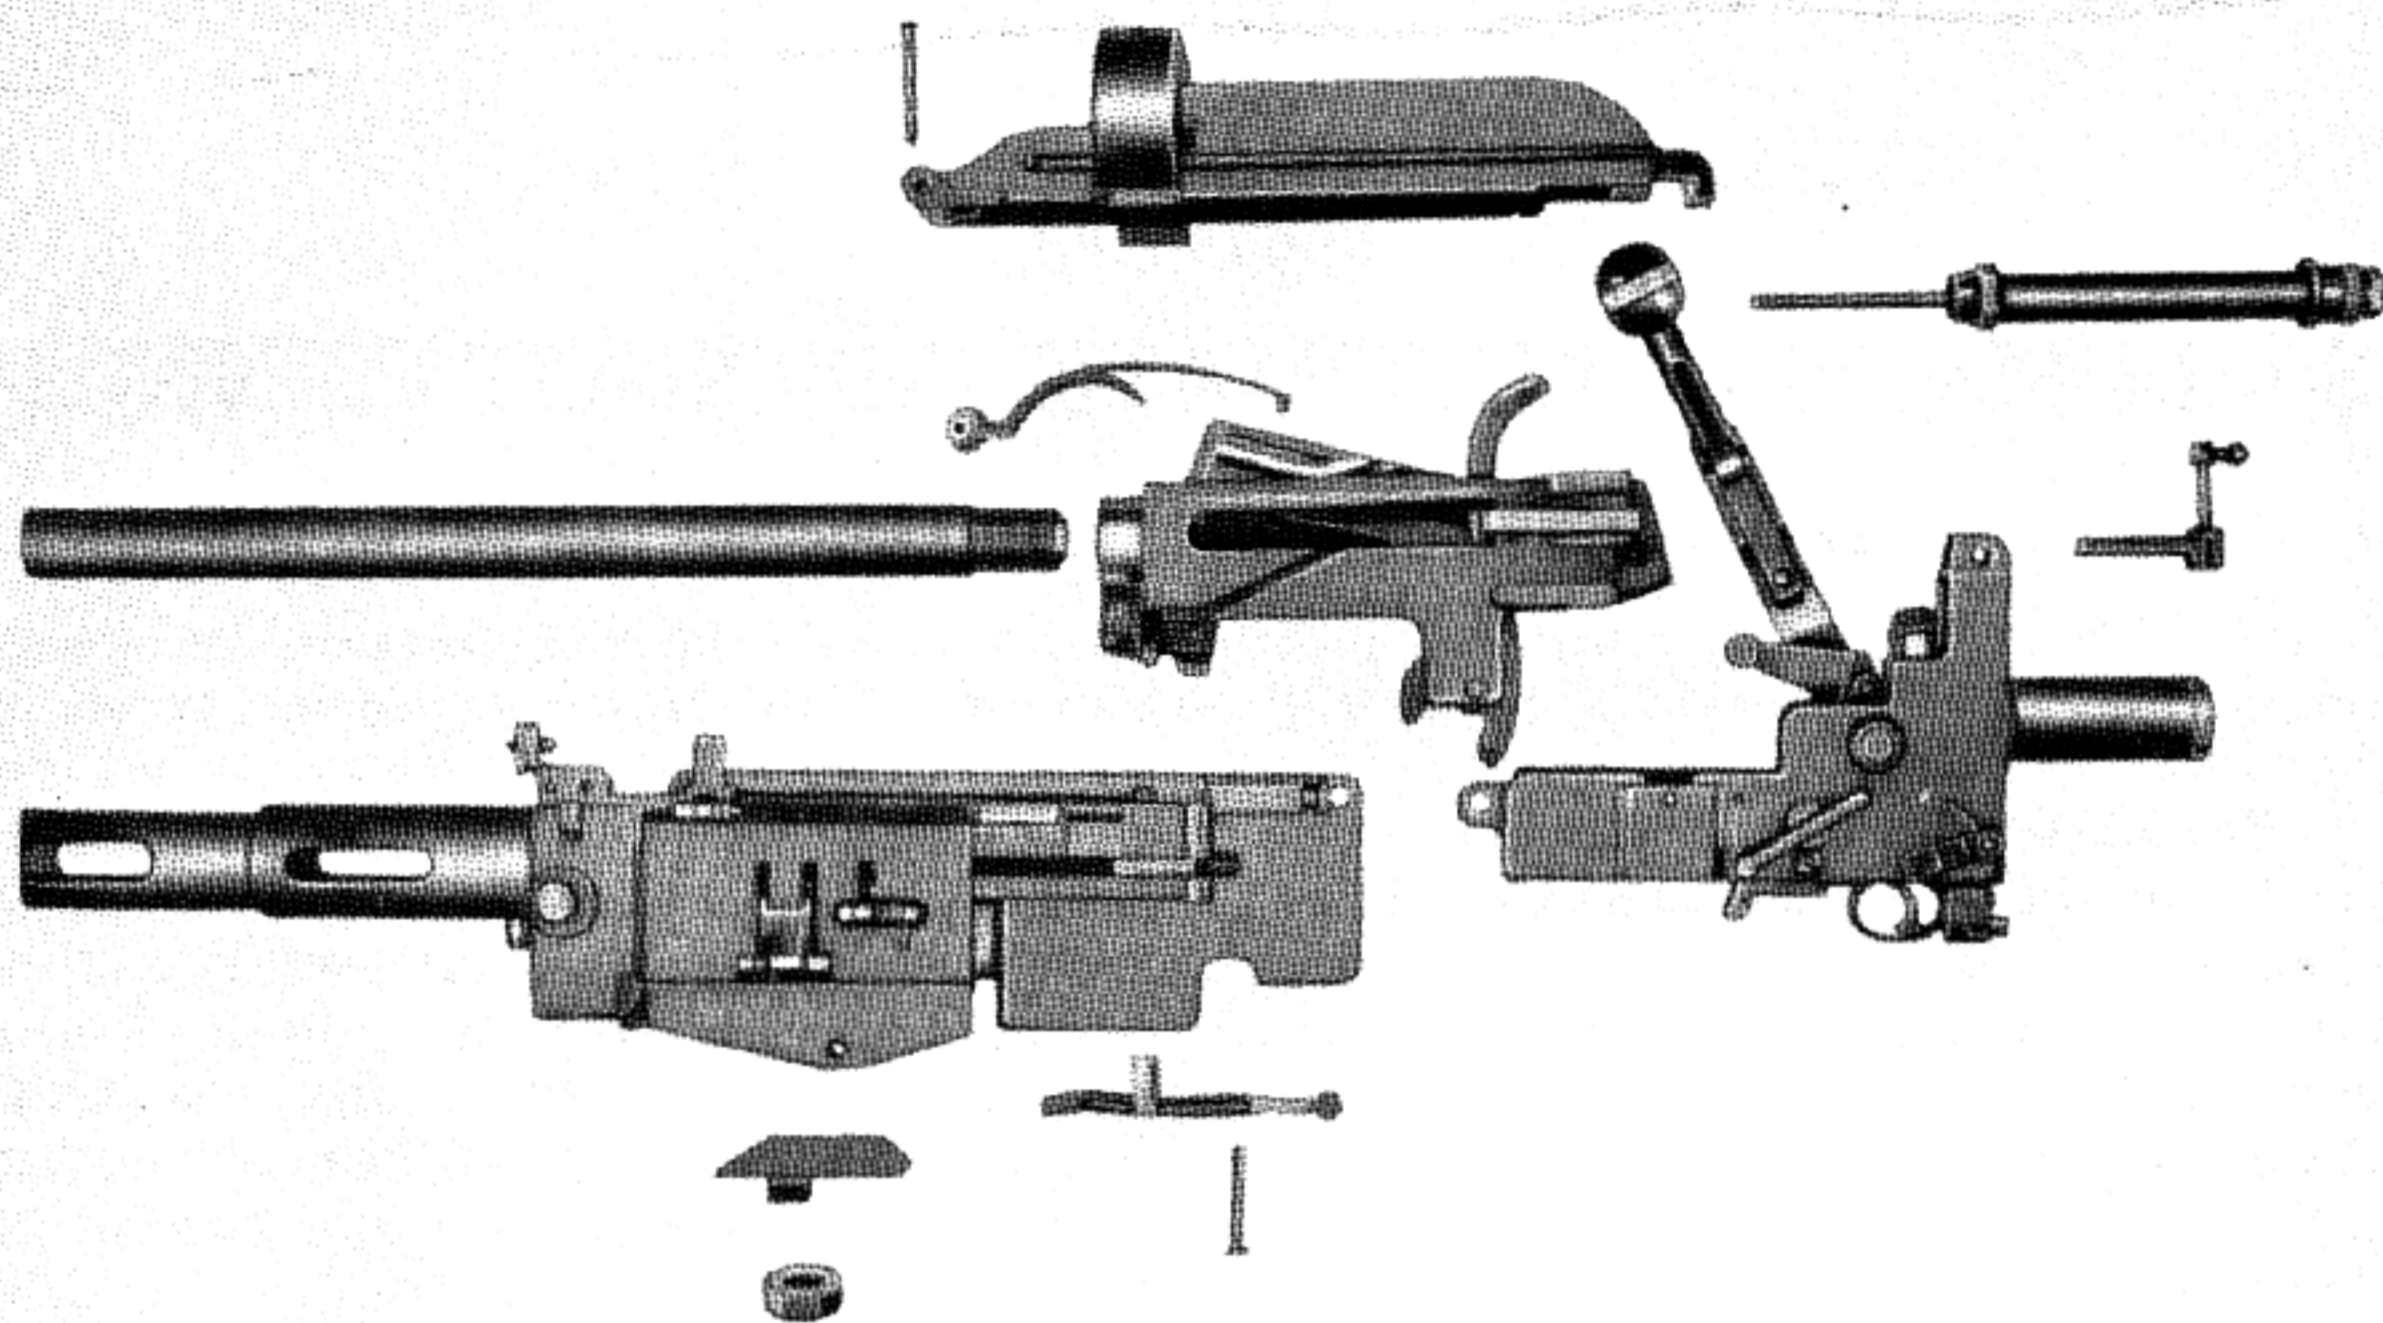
23-mm Madsen Automatic Aircraft Cannon. Disassembled view.
